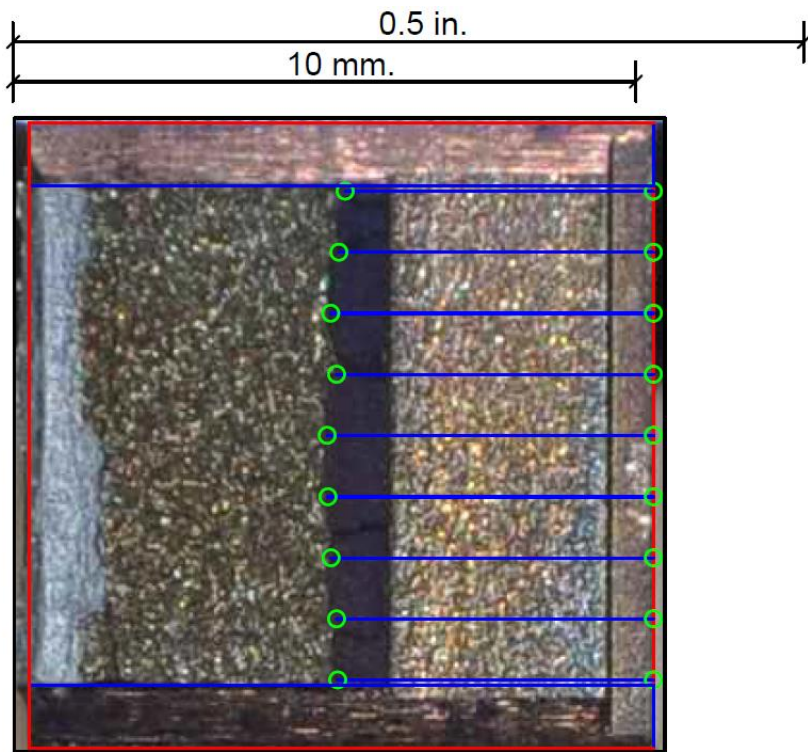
Specimen J20' Fracture Surface
